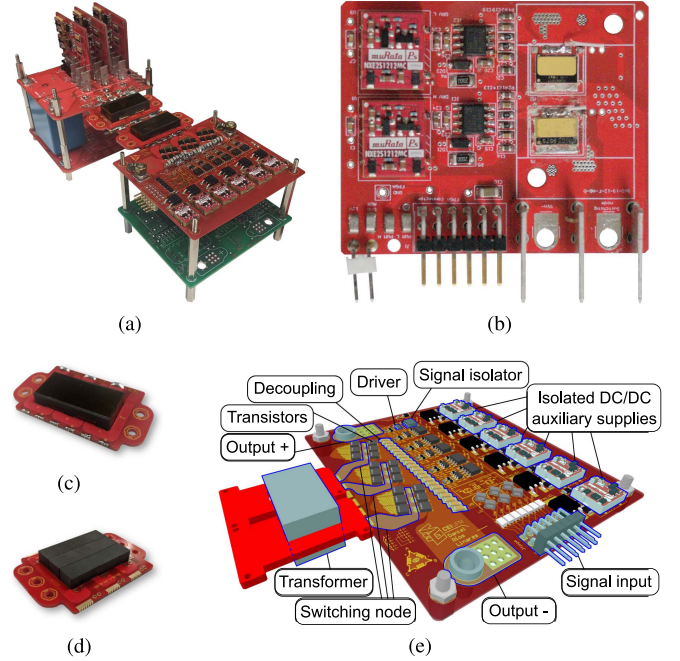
Prototype key parts. (a) Power stage. (b) Inverter card. (c) Transformer. (d) Inductor. (e) Rectifier composition.
